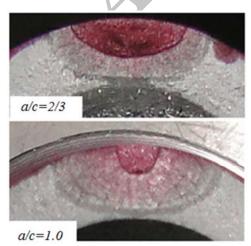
Two samples of the fatigue fractured surfaces \hat{z} شکل 7 دو نمونه از سطوح شکست خستگی
